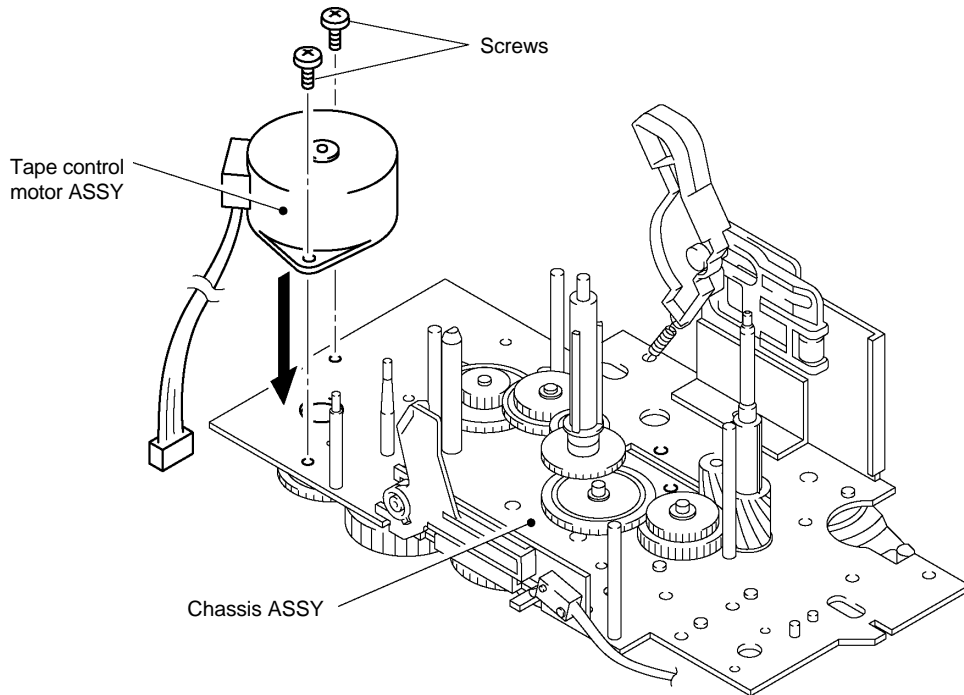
Reassembling the T Control Motor ASSY
